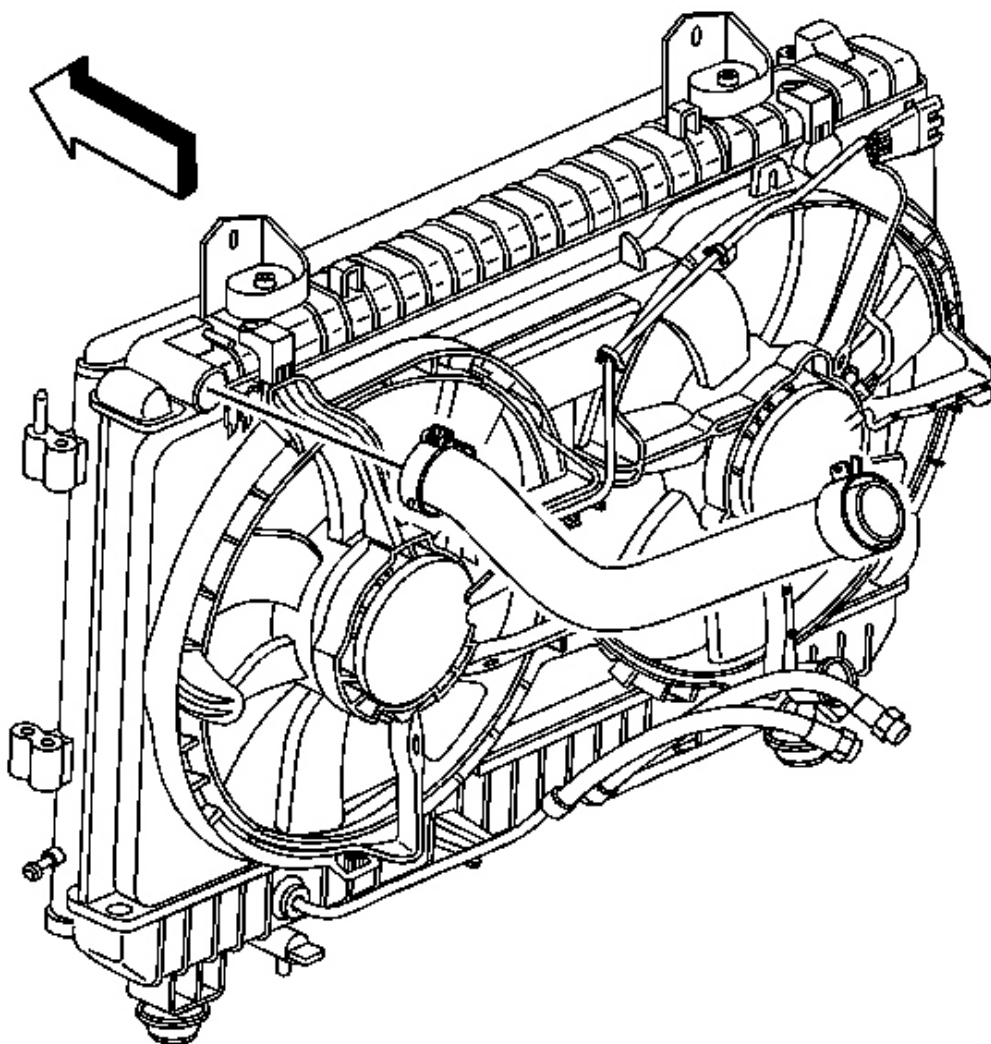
Radiator Inlet Hose & Clamp At Radiator
